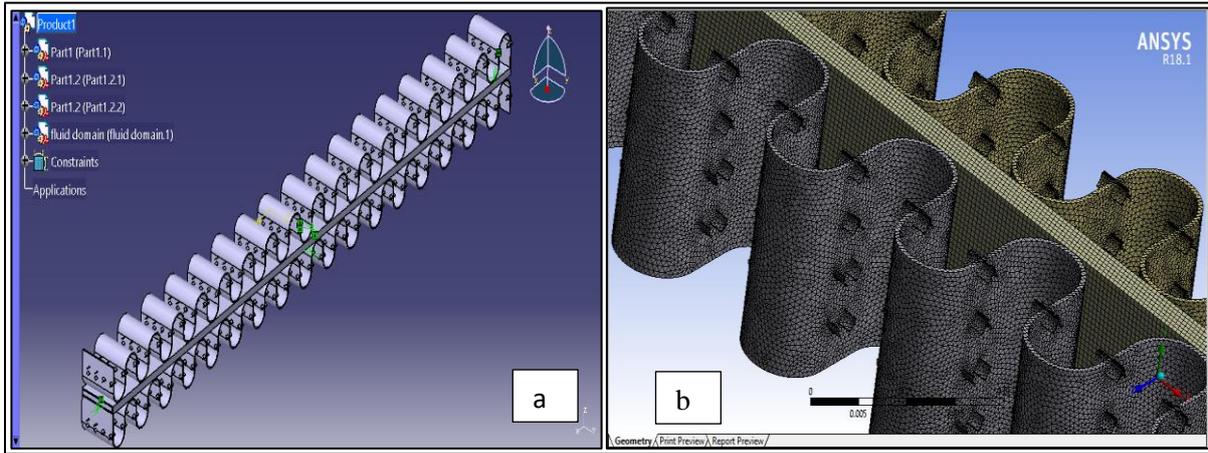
a) Isometric view of car radiator b) Mesh of the car radiator
